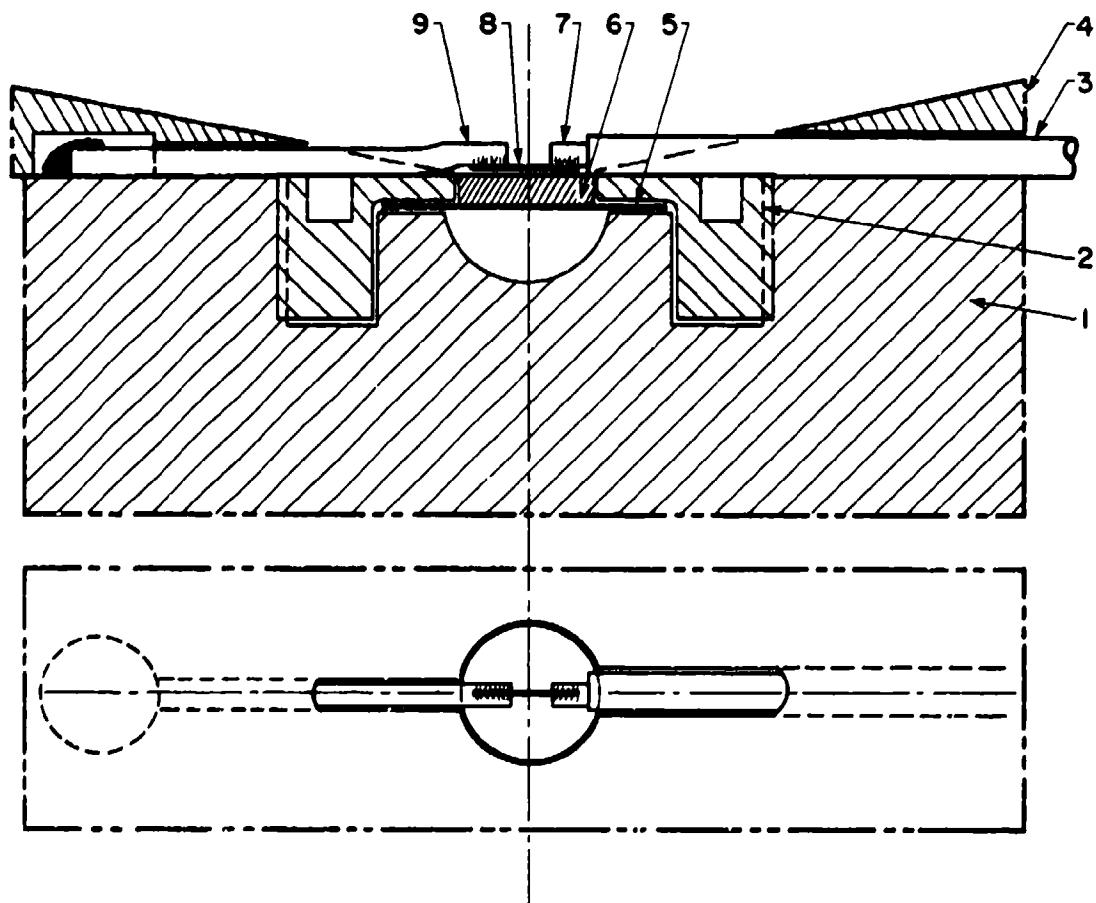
(b) EXPLODING-WIRE ASSEMBLY, MODEL II.
